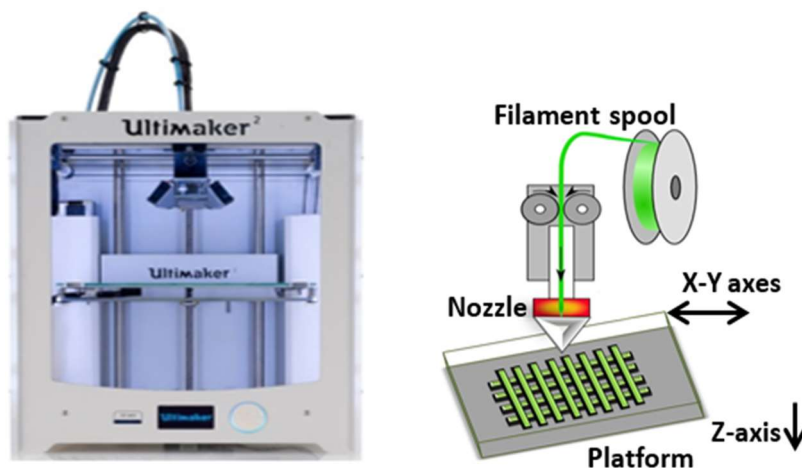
3. Fused Filament Fabrication machine (FFF) commercially available machine (Ultimaker 2) used for fabricating PLA scaffolds and diagram explaining the process.
